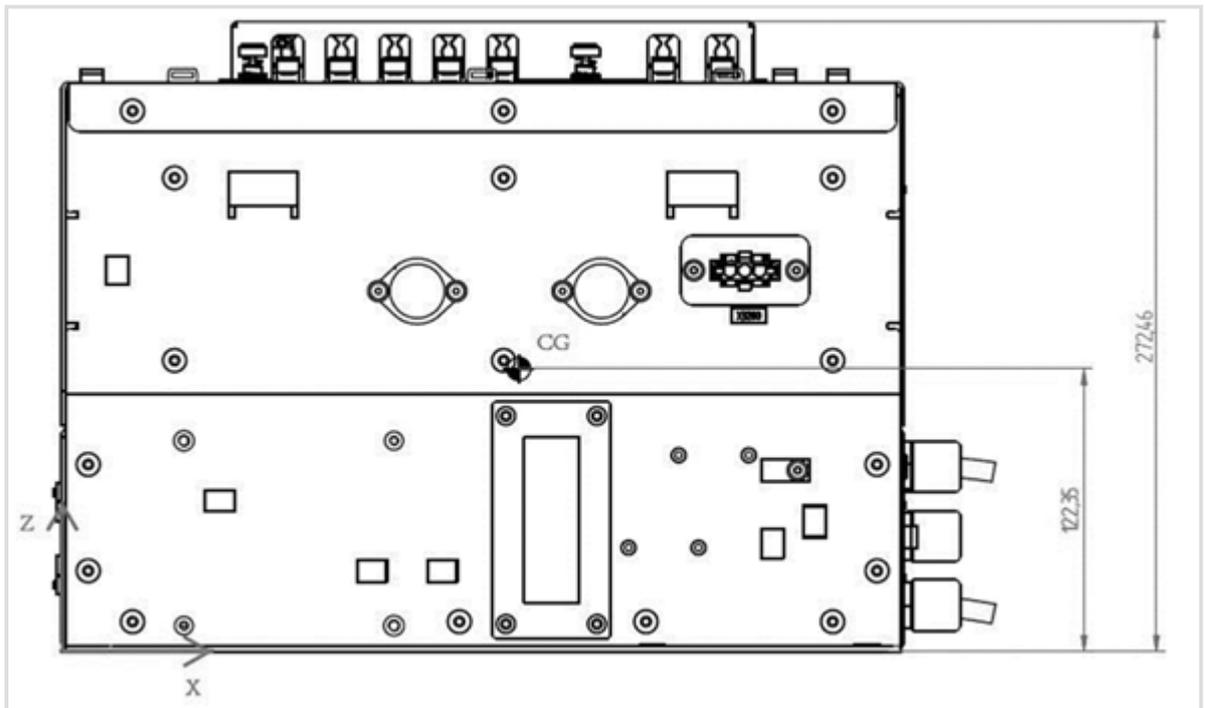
Mechanical dimensions of the System Interface Unit (side view)
